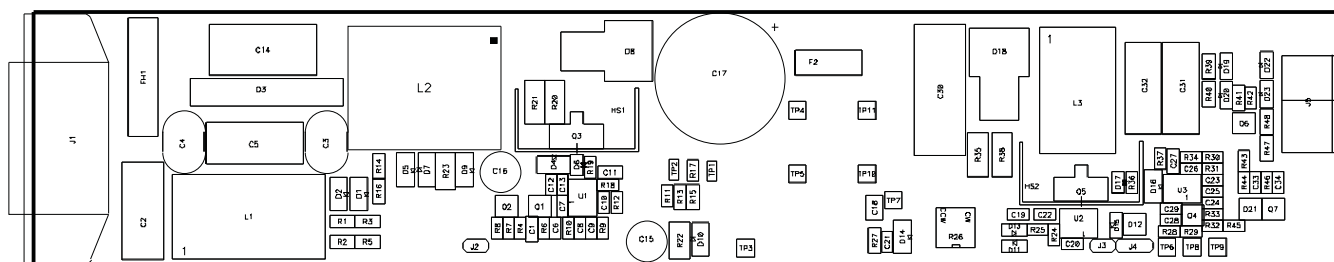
UCC28810EVM-002 Top Layer Assembly Drawing (top view)
